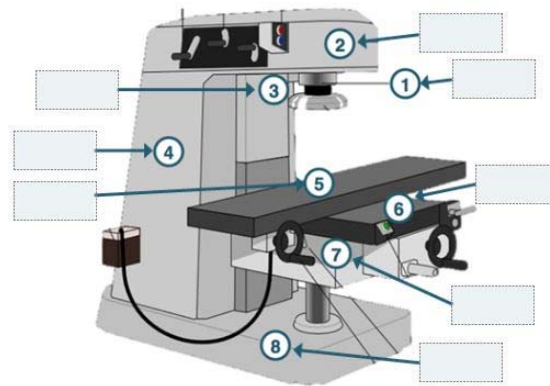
CAD model (fill in the label blanks) created for demonstrating milling operation
